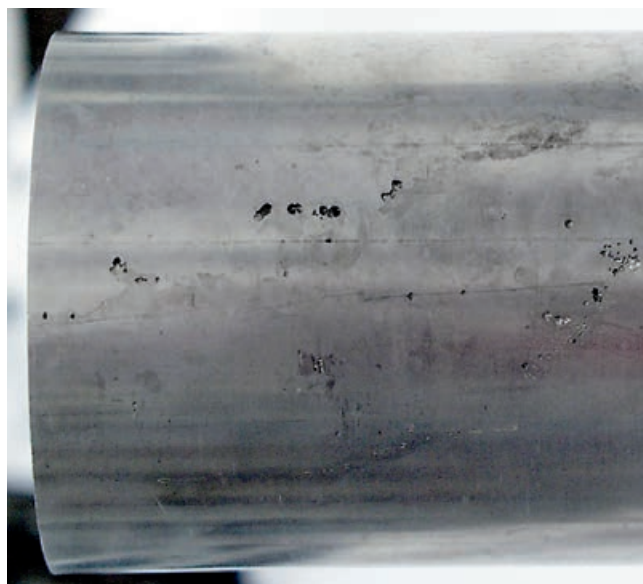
2. Pitting corrosion on the outside of a tube.
